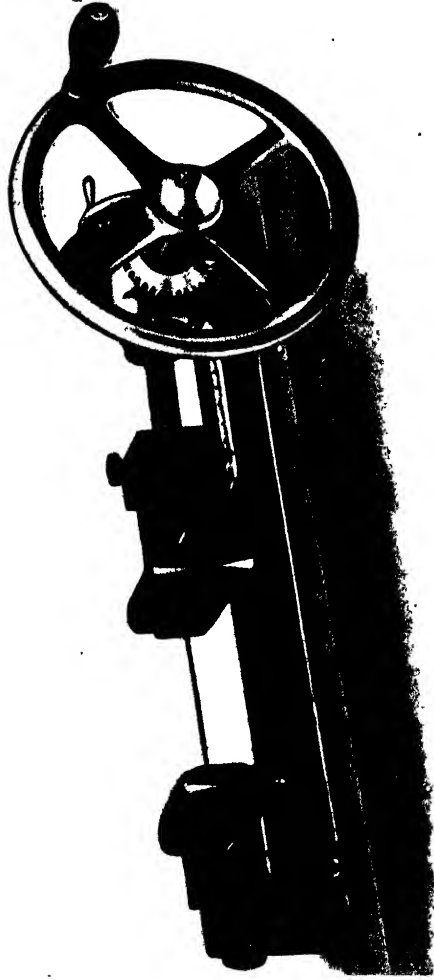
A SIMPLE MACHINE FOR MAKING TENSILE TESTS ON STRIP AND WIRE
